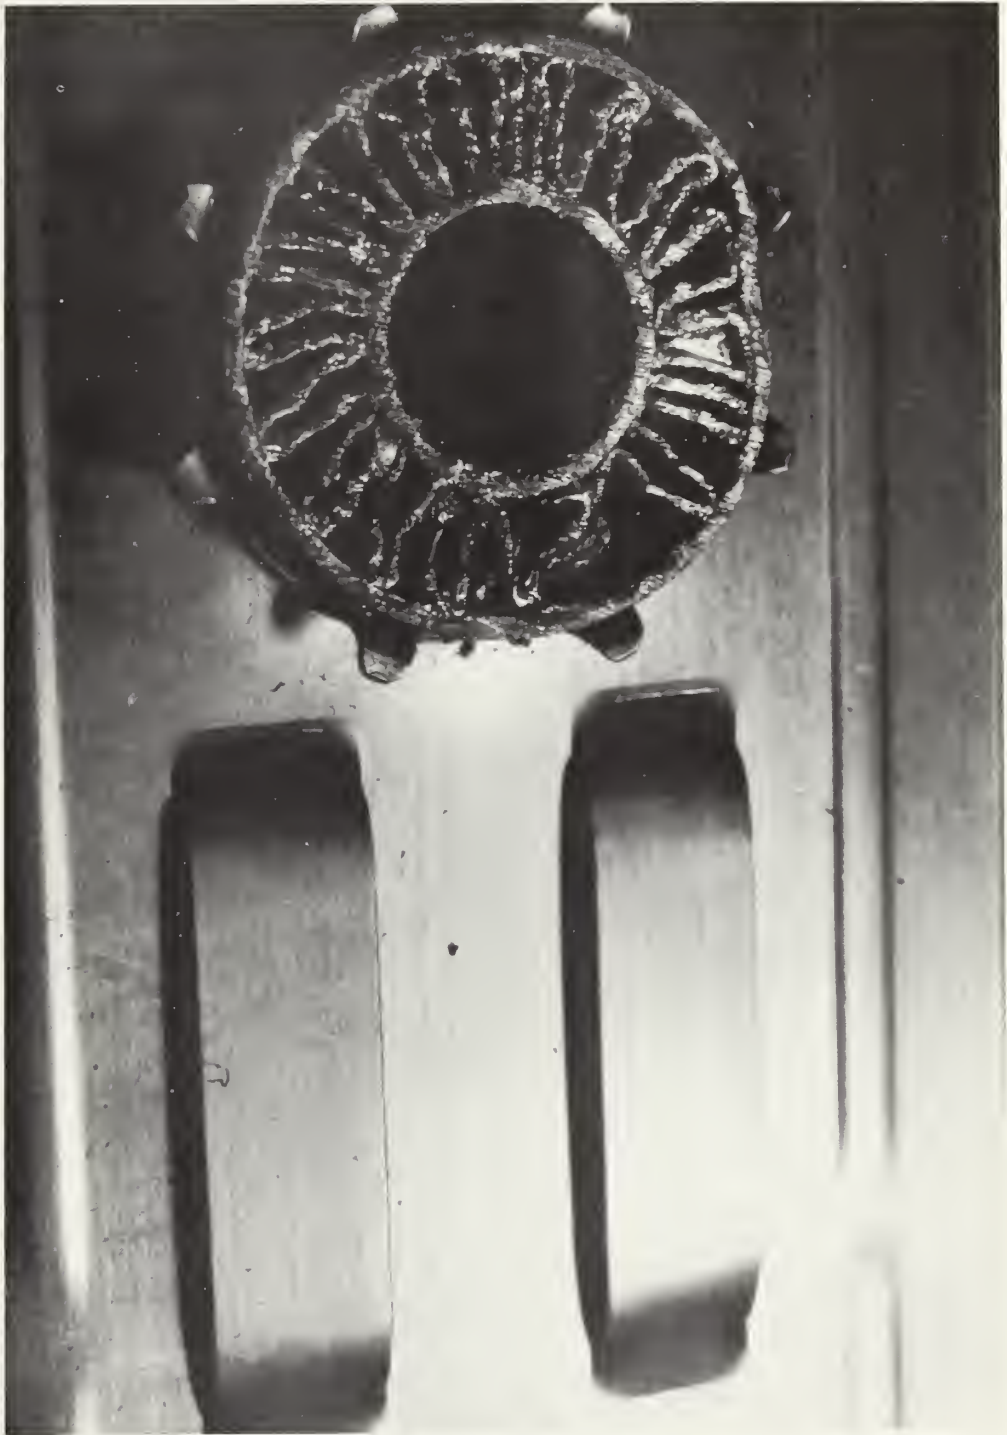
Typical Dunham-Bush fin collar, tube and "Inner-Fin" assembly. Irregular appearance of the inner fin was caused by the sectioning operation.
